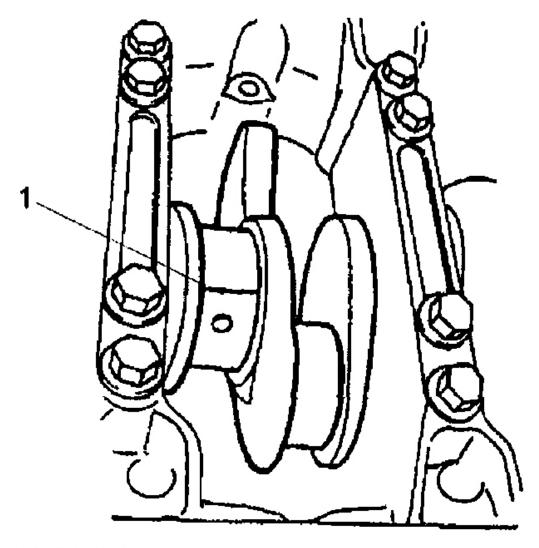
Identifying Undersize Bearing Courtesy of SUZUKI OF AMERICA CORP.
